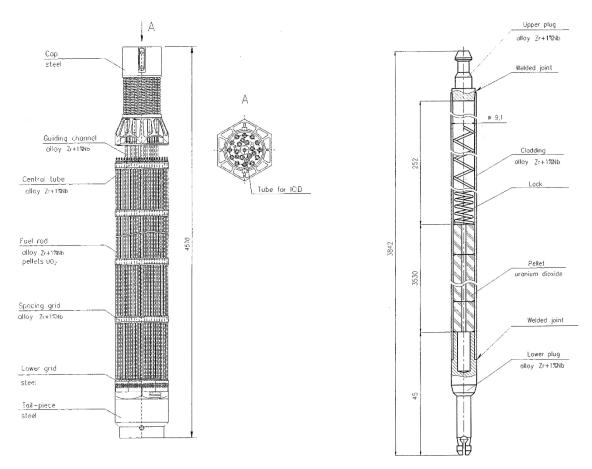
Fuel assembly and fuel rod used in the Bushehr NPP
